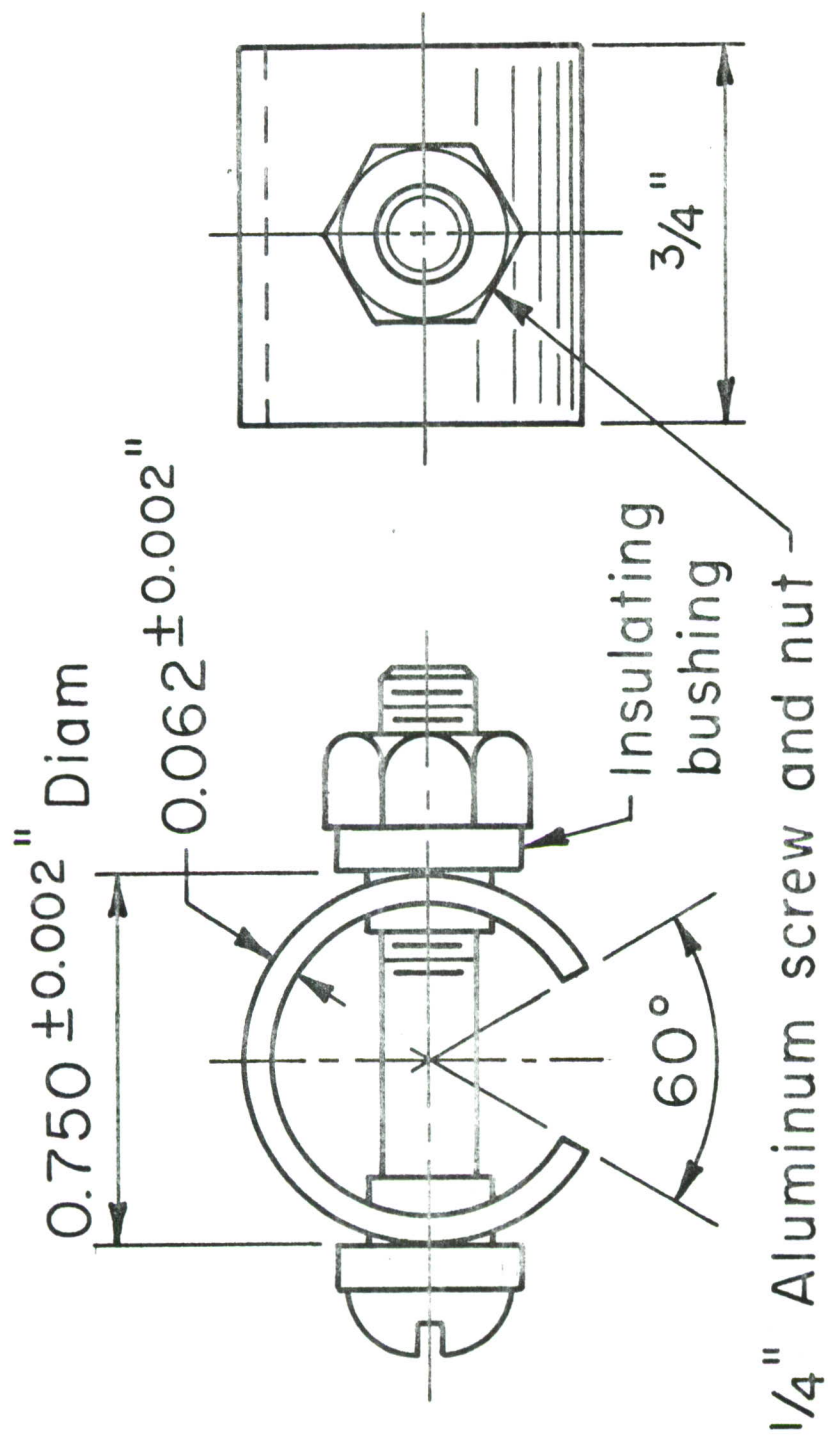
C-ring Assembly for Short-Transverse Stress Corrosion Tests.
